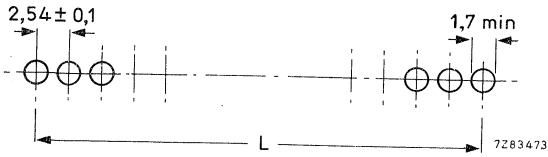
Hole pattern for single-row bottom-entry sockets; see Table 1 for dimension L.
